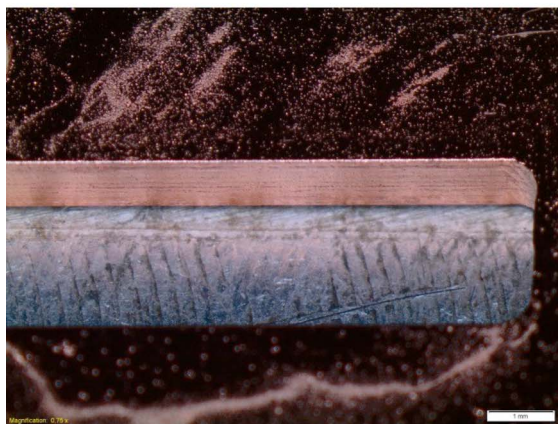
Top view of one PCB with a thin bath of soldering paste.
